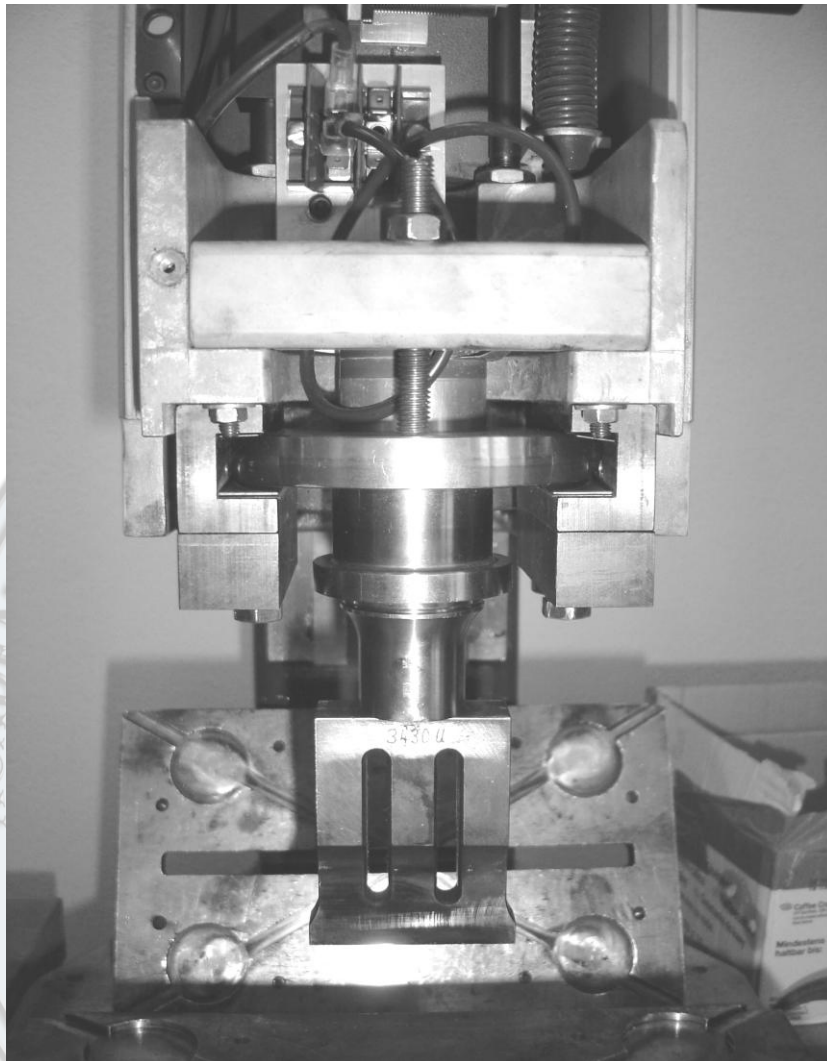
The acoustic chain realized and mounted on welding machine.
